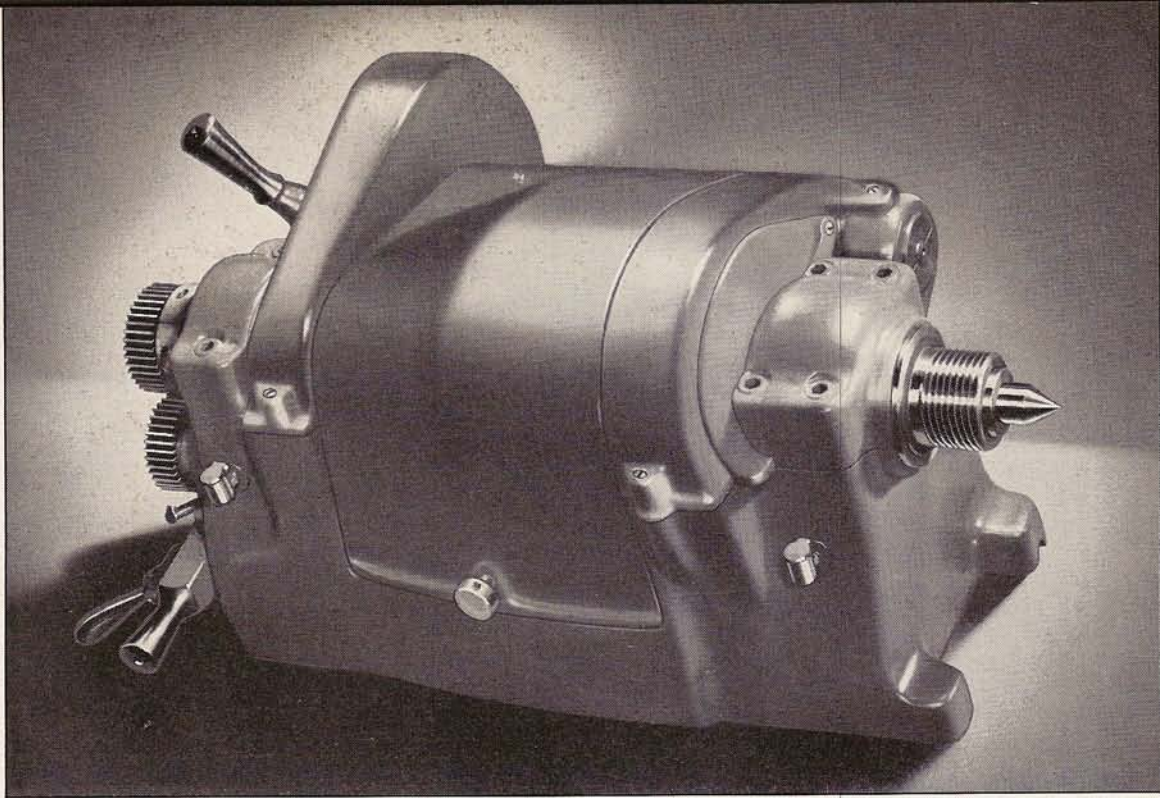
Headstocks for all South Bend Lathes listed in this catalog have an improved hinged guard over the bull gear lock pin similar to that shown above. This guard can also be supplied for older models of South Bend Lathes. Prices on request.
